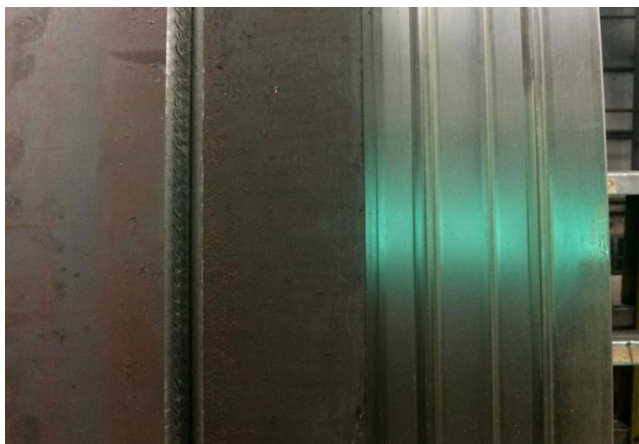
Permalok Joint Ring fit up (groove weld)
